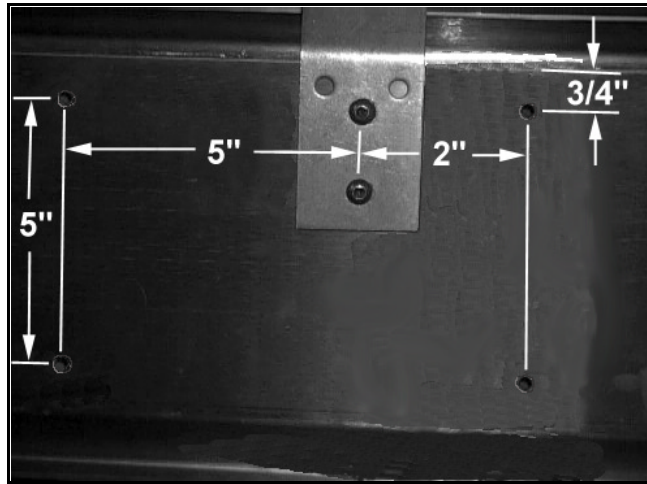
LICENSE PLATE MOUNTING HOLES
